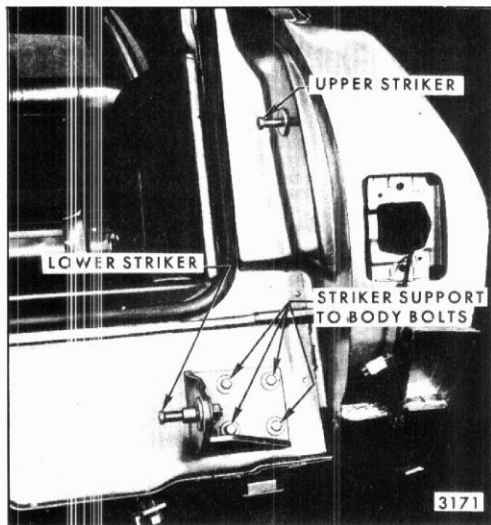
Dual Acting Tail Gate Right Upper and Lower Striker Assemblies
